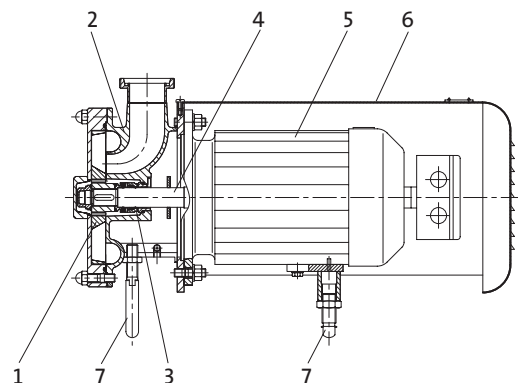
Sectional drawing of SIPLA Bloc-SUPER on stainless steel ball feet
